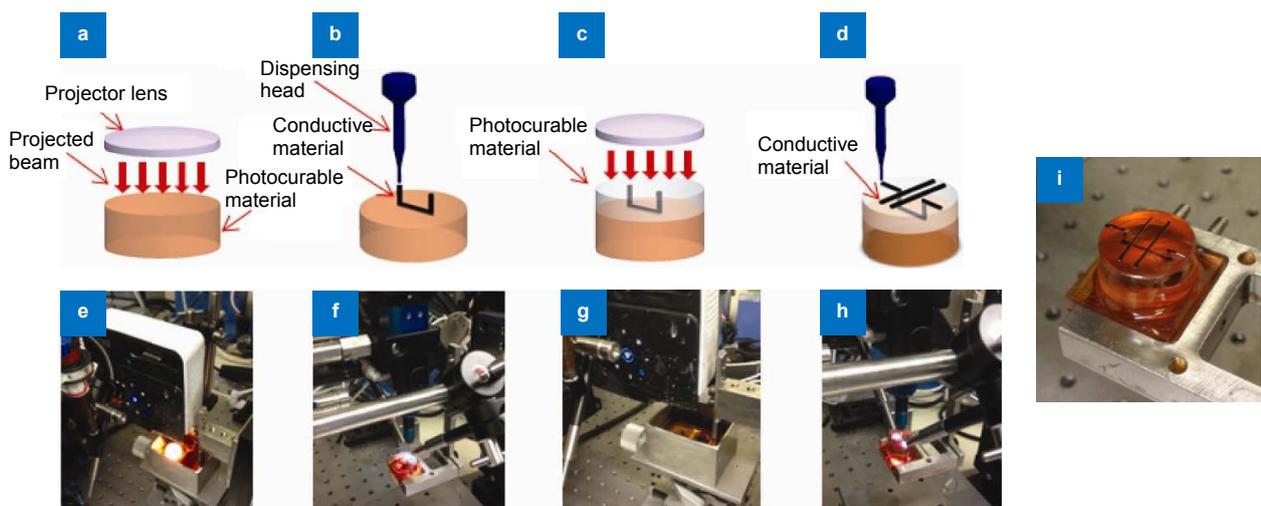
| The hybrid 3D printing process and fabricated 3D structural electronics. (a) Bottom insulating structure. (b) "U" shape wire. (c) Top insulating layer. (d) Wires on top surface. (e) PμSL of the bottom insulating structure. (f) DWC of the "U" shape wire. (g) PμSL of the top insulating structure. (h) DWC of wires on the top surface. (i) Fabricated 3D structural electronics with embedded wires. Figure reproduced from ref. ¹⁰, Springer International Publishing AG.
